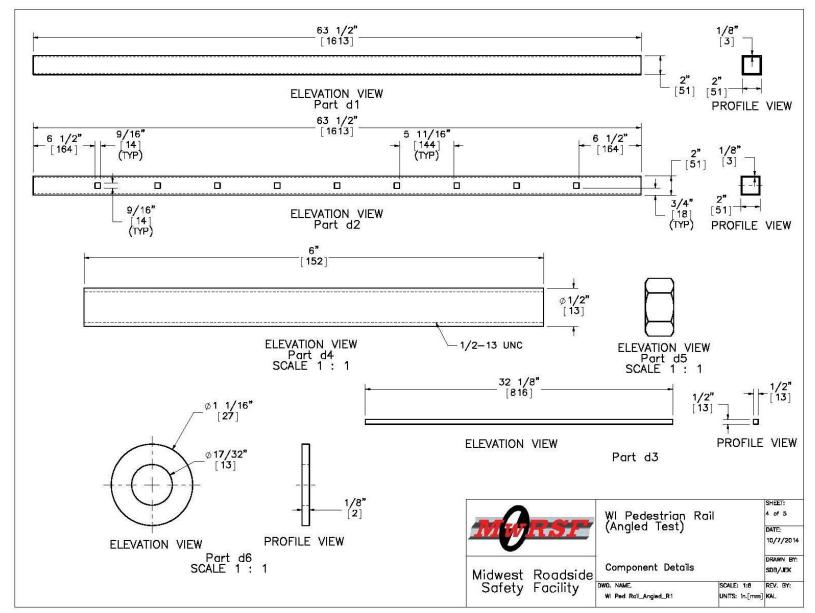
Component Details, Test Nos. APR-1 and APR-2
